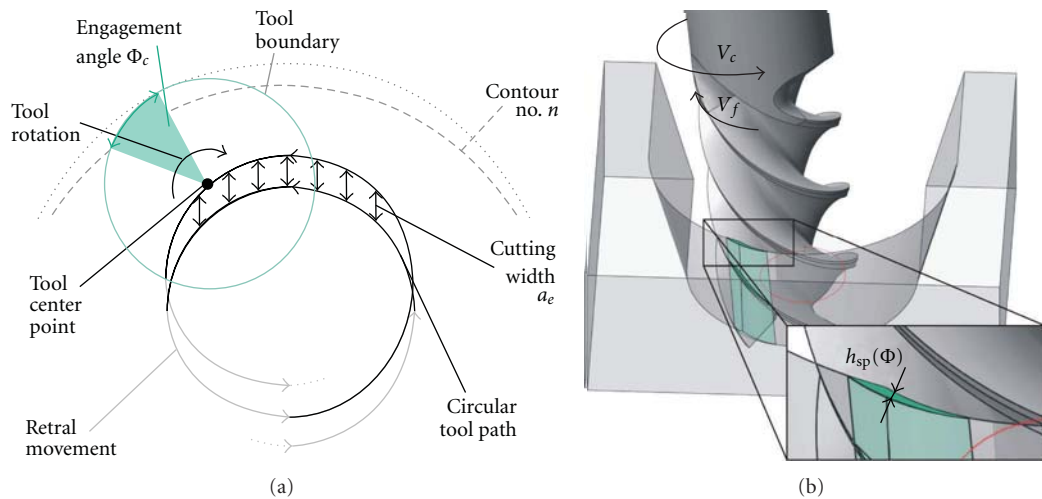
Macroscopic (a) and microscopic (b) contact conditions of circular milling.
